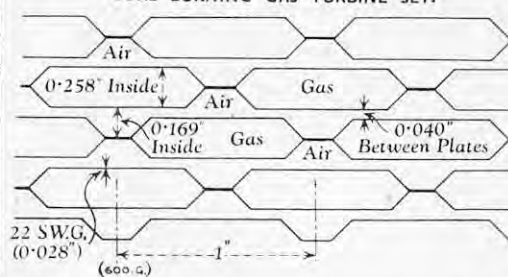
PLATE ARRANGEMENT IN HEAT EXCHANGER FOR 2,000 KW ENGLISH ELECTRIC COAL-BURNING GAS-TURBINE SET.
